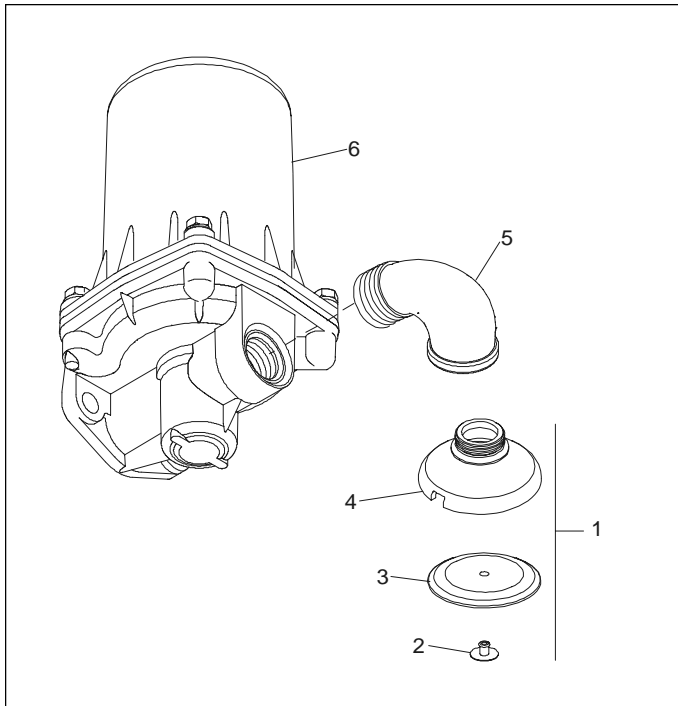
#8 Vent Valve Portion & Vent Valve Protector Assembly - Exploded View
